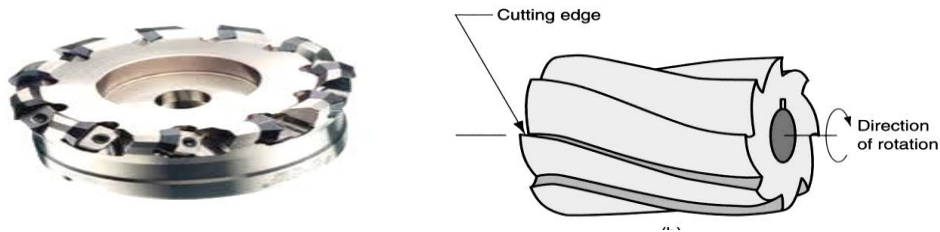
Multi Tooth Cutting tool (Source:Groover, 2007)
